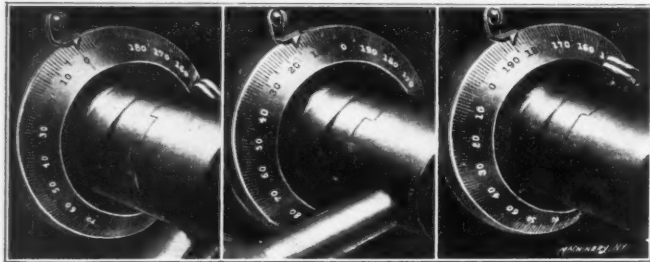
Cross-feed Dial when Work Spindle is Set Central. Fig. 17. Cross-feed Dial Set for Cutting Outer Side of Tooth. Fig. 18. Cross-feed Dial Set for Cutting Inner Side of Tooth.
